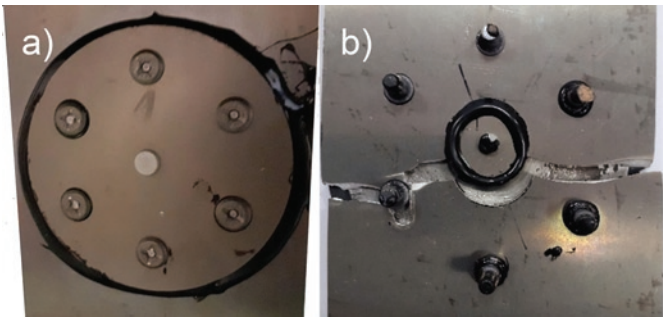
View of a hybrid strapped joint (MBF2110AB-05-150 rivets and Raychem S1125 compound): (a) after preparation of specimen, (b) damaged in durability tests
